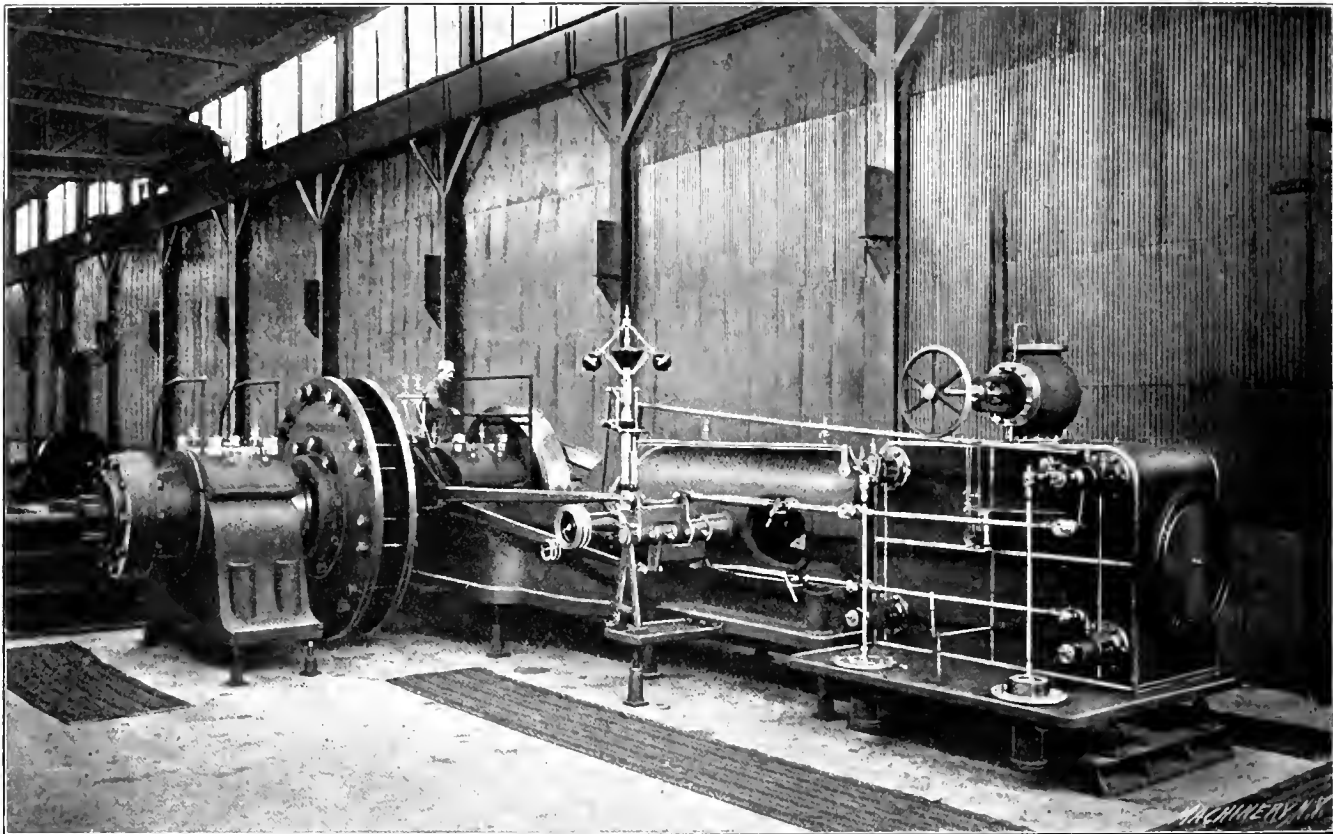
Rolling Mill Engine built from "Pig Iron to 3500 H.P." in Thirty Days
